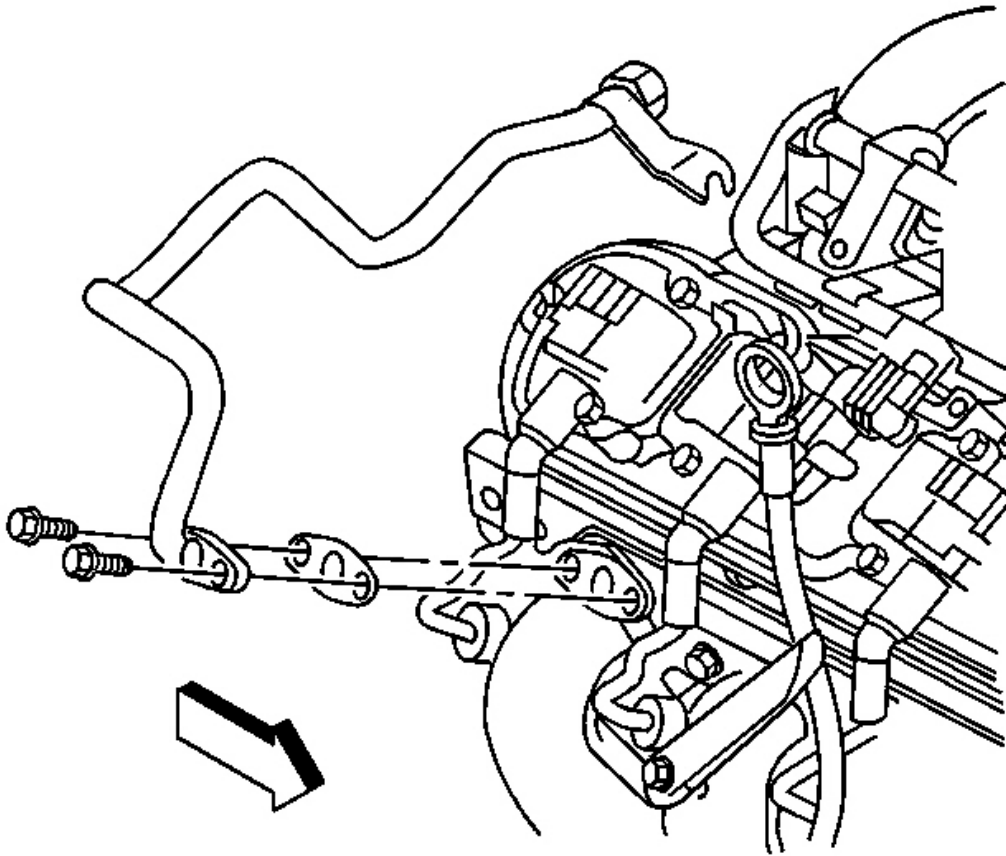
Air Pipe, Bolts, Gasket & Right Exhaust Manifold
